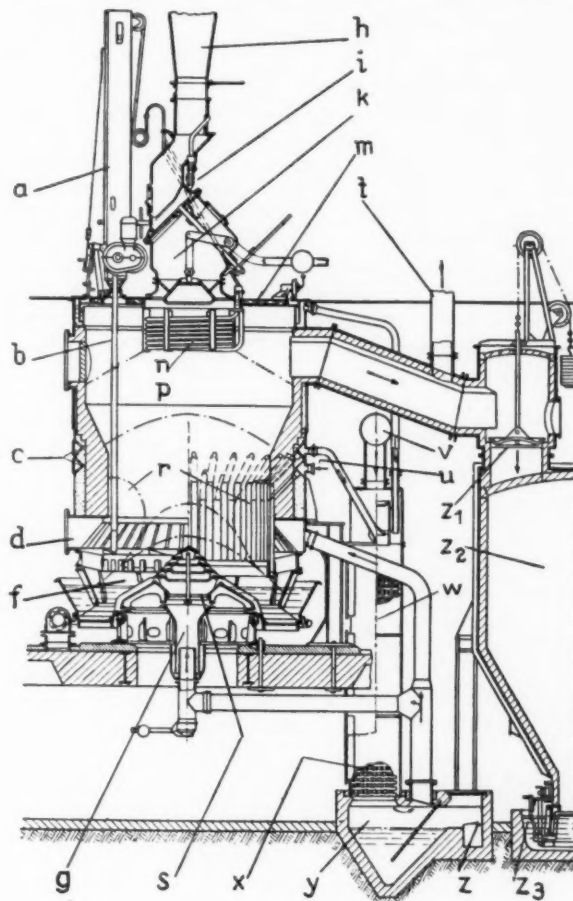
SECTION THROUGH GAS PRODUCER, BLAST SATURATOR, AND DUST SEPARATOR
